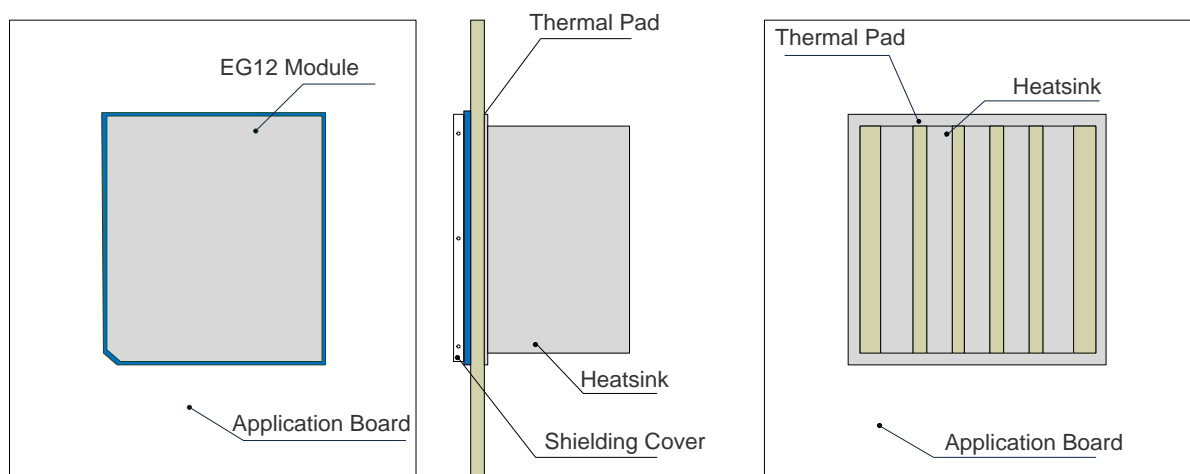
Referenced Heatsink Design (Heatsink at the Backside of Customers' PCB)
